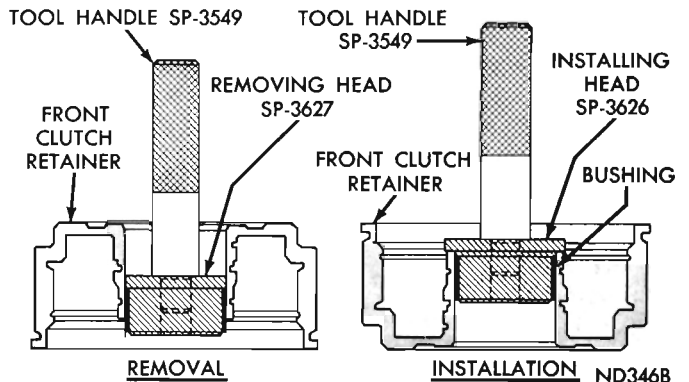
Replacing Front Clutch Retainer Bushing (A-904)
